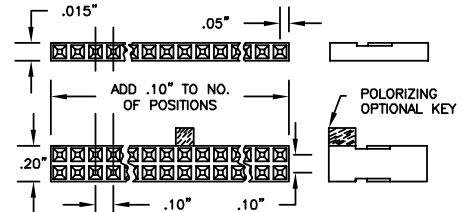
HOUSING SIZES: WHEN ORDERING LEAD ASSEMBLY, SPECIFY NO. OF POSITIONS. IF SINGLE ROW, 2 THRU 36; DOUBLE ROW, 2 X 2 THRU 2 X 36 (Polarizing Key Available on Request).
